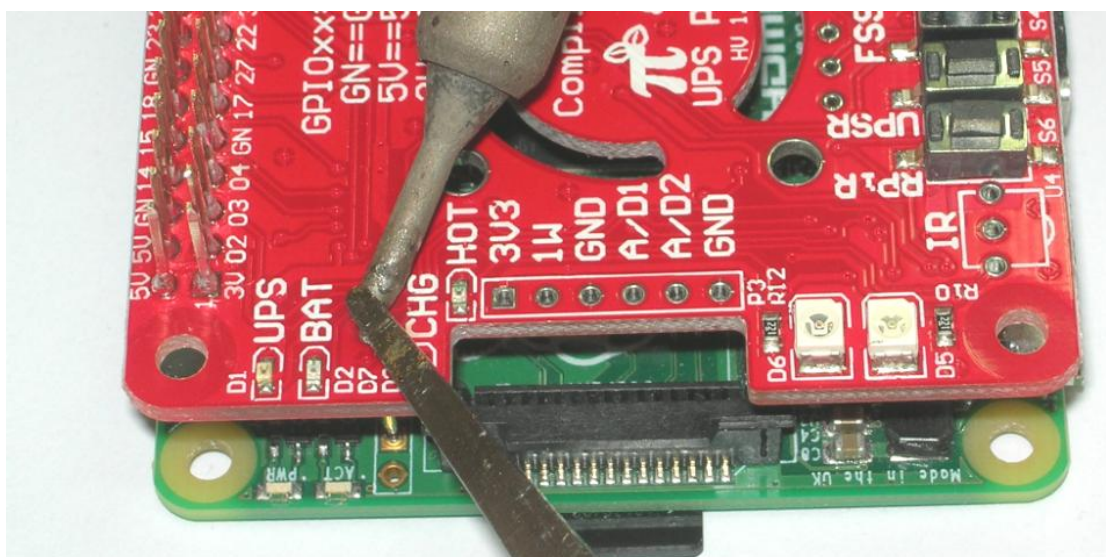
Re-soldering of the Gold Plated Reset Pin while pressing it
